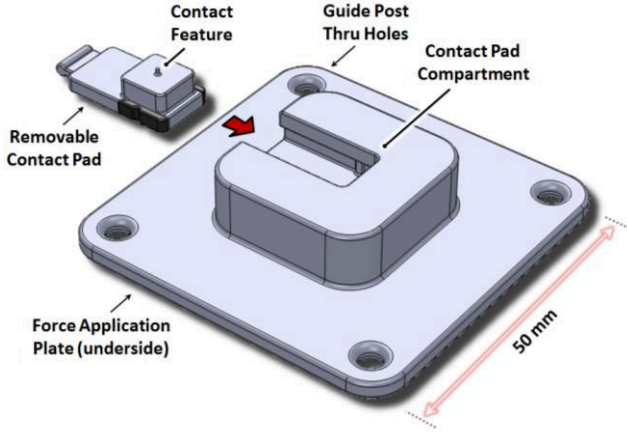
Components of the soft tactile sensor testbed force application plate (underside) with removable contact pad.
